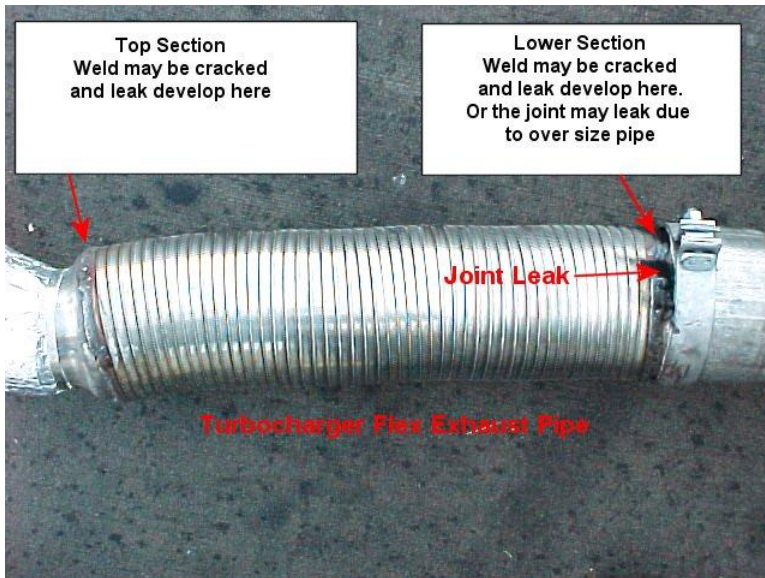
Inspect Turbocharger exhaust pipe for cracked welds and leaks as shown.
